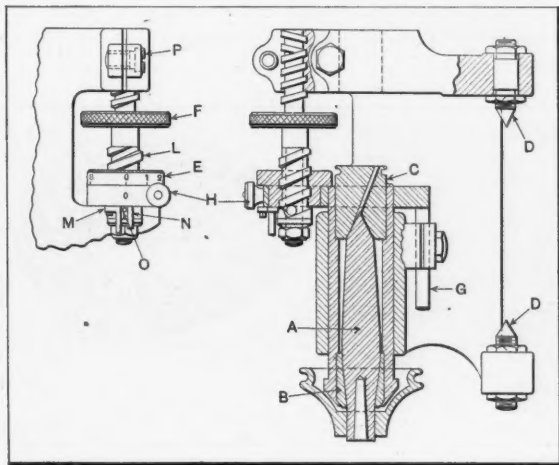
Cutter-spindle Construction of Gorton Engraving Machine
